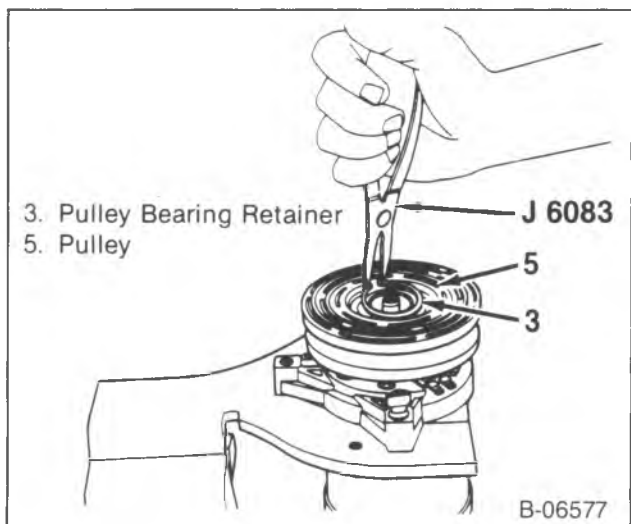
Removing the Pulley Rotor and Bearing Retaining Ring
